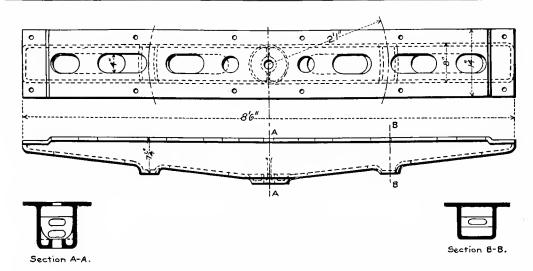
Cast Steel Box-Section Body Bolster. American Steel Foundries.
